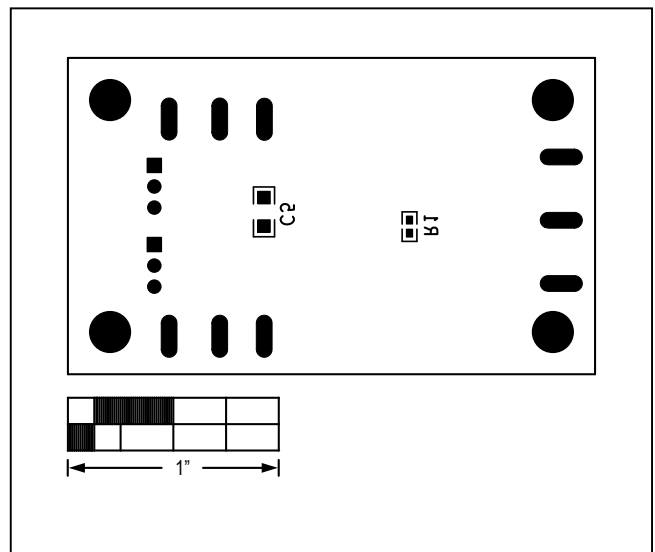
MAX258 EV Kit Component Placement Guide—Solder Side
